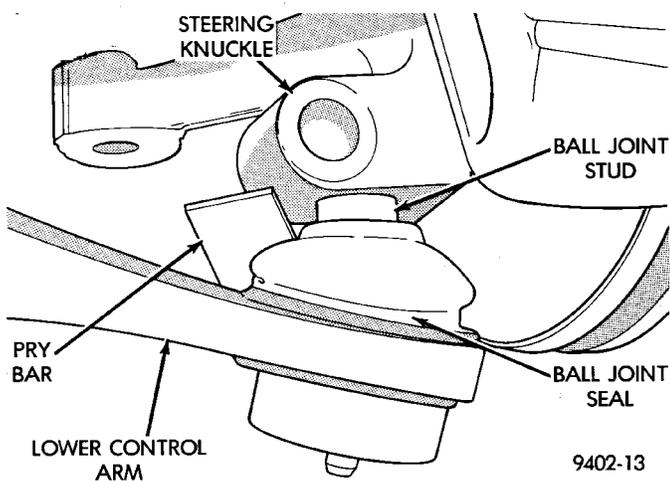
Separate Ball Joint Stud from Knuckle Assembly
